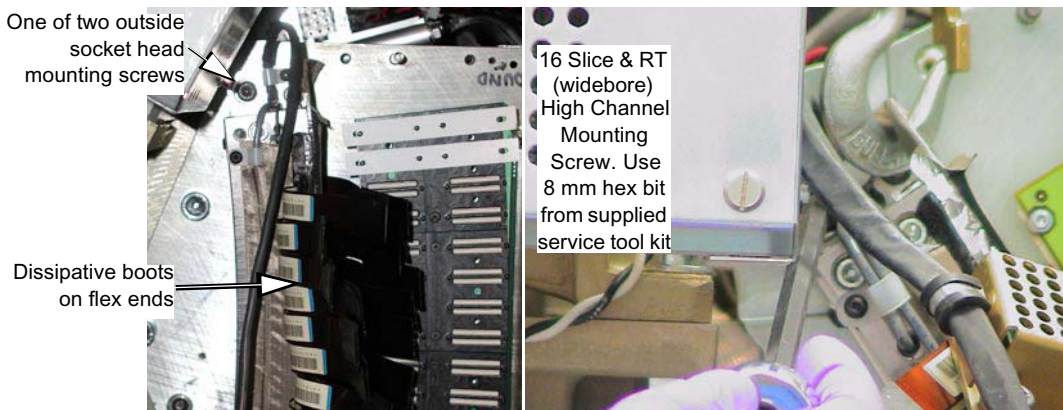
“Upper” end of detector assembly (viewed with assembly at 3 o’clock)
